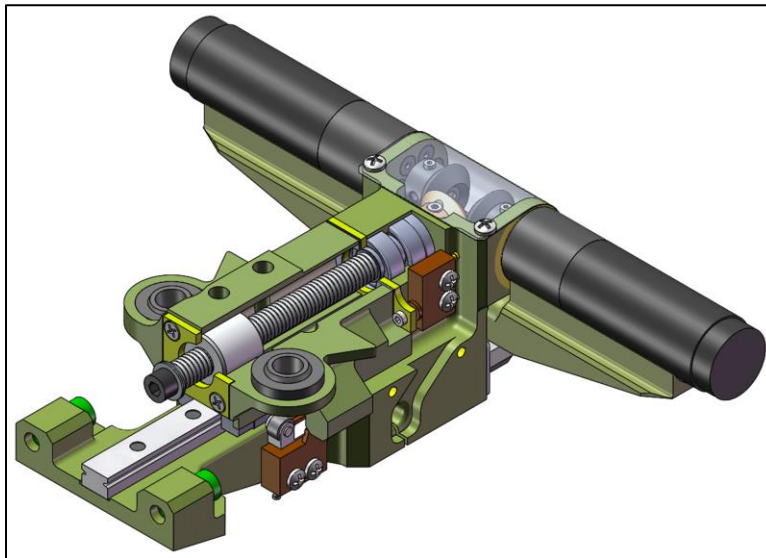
Motor Bracket Assembly in the set-for-flight state
